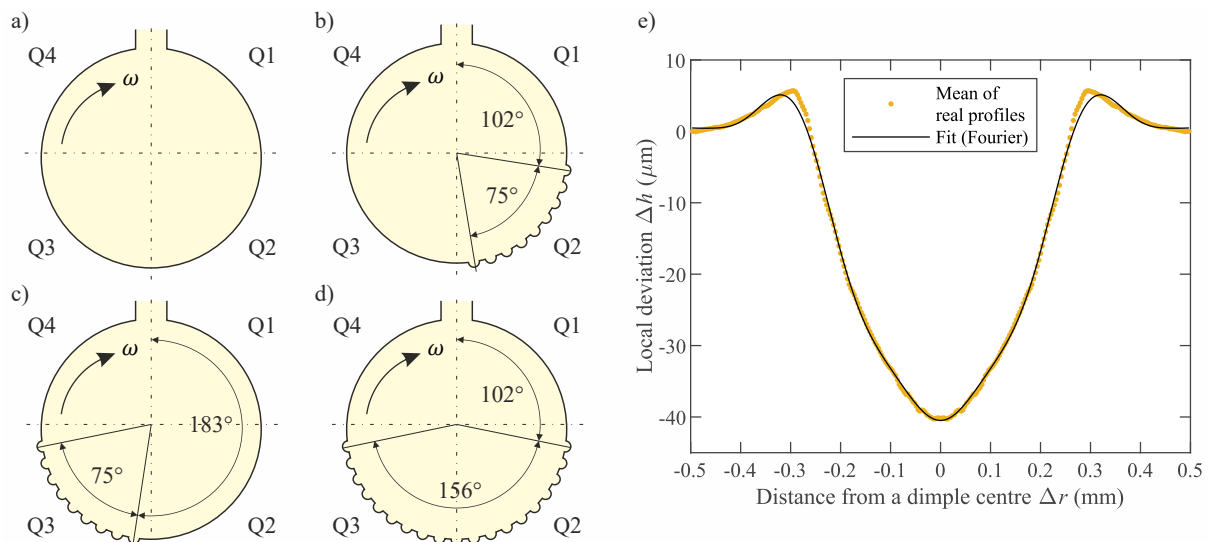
Investigated bearing layouts: a) plain bearing, b) layout Q2 (26×19 dimples), c) layout Q3 (26×19 dimples), d) layout Q23 (53×19 dimples), e) measured dimple profile
